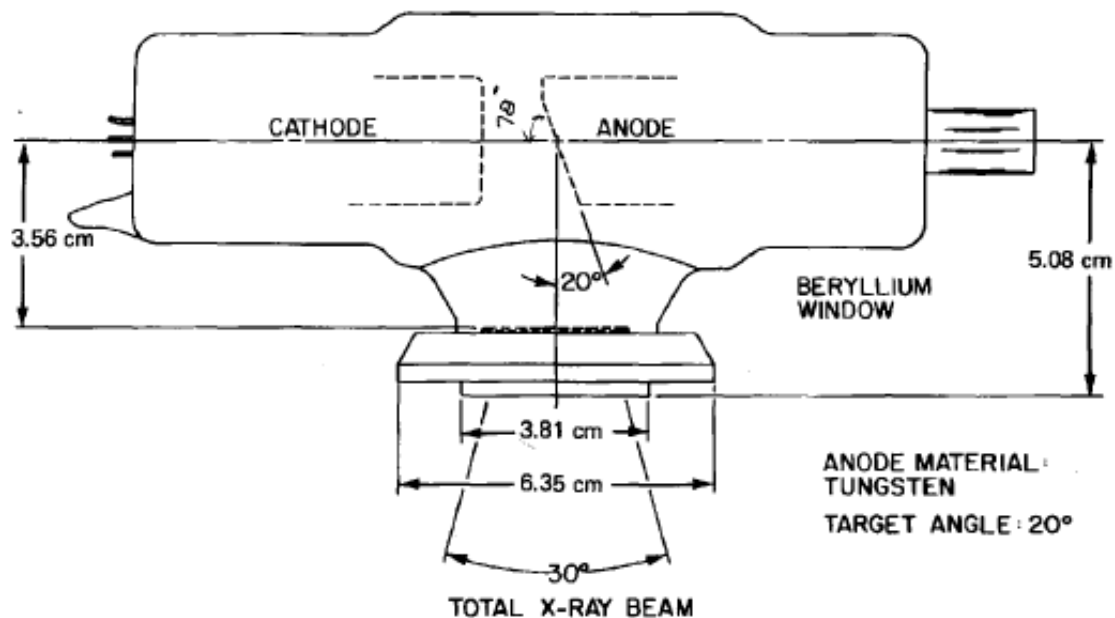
Outline drawing of Faxitron standard X-ray tube.
